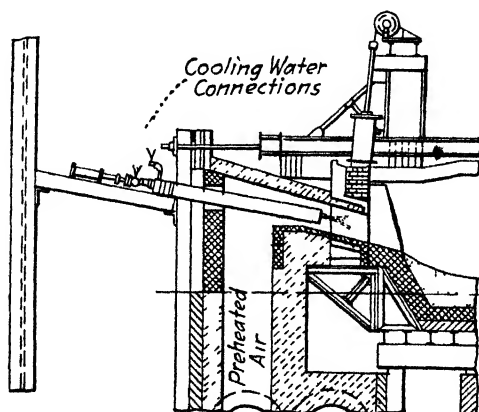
Water-cooled oil burner applied to open-hearth furnace. (Hauck Manufacturing Company)
